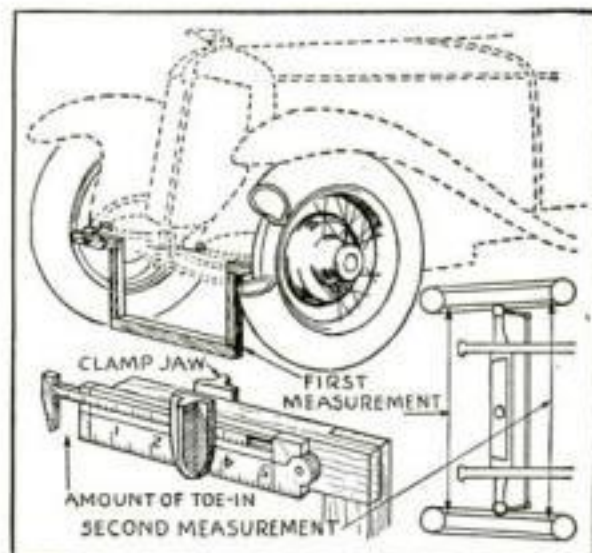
By clamping a slide caliper to end of a U-shaped wooden frame, you have a gage that can be used to test the toe-in of front wheels
